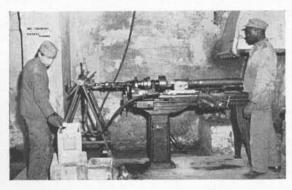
The round is placed in a special lathe operated by compressed air. (The lathe is tied in with an air drill; when air is applied, the drill furnishes power for the lathe at slow speeds.)
